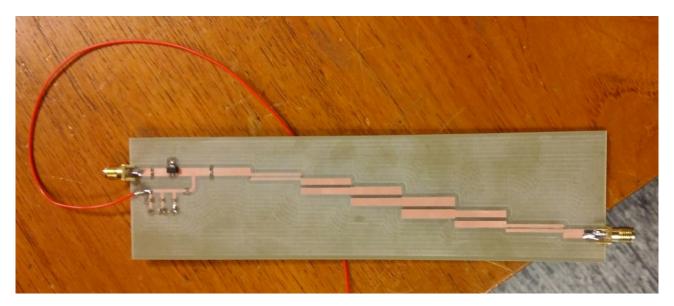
The final, soldered design. The filter matching sections can be seen on the PCB, too.
